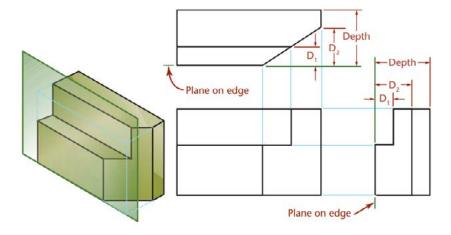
Transferring Depth Dimensions from a Reference Surface
